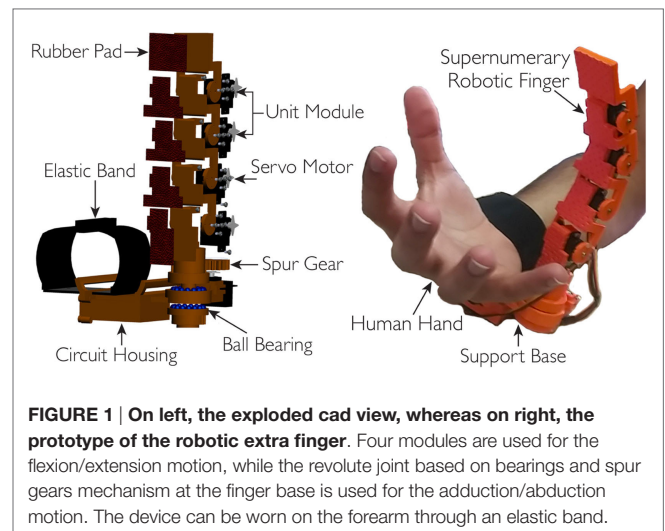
| On left, the exploded cad view, whereas on right, the prototype of the robotic extra finger. Four modules are used for the flexion/extension motion, while the revolute joint based on bearings and spur gears mechanism at the finger base is used for the adduction/abduction motion. The device can be worn on the forearm through an elastic band.
